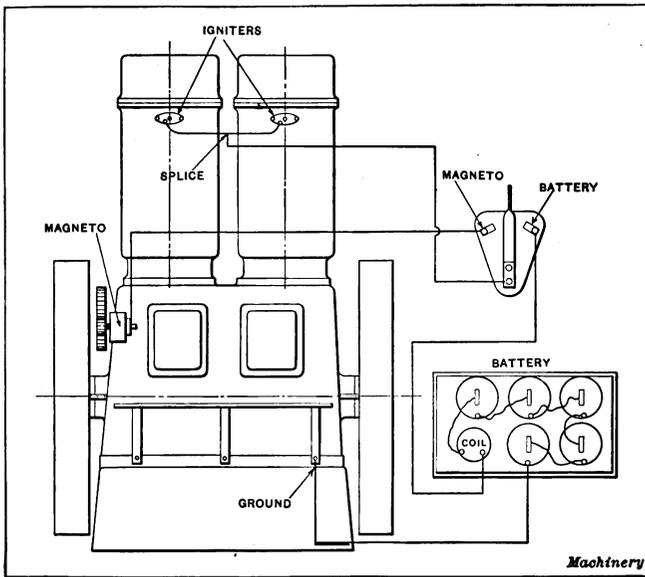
Wiring for Two-cylinder Vertical Engine with Batteries and Gear-driven Magneto
